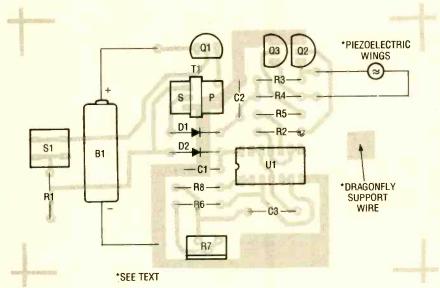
Solder the parts to the printed-circuit board as shown here. Note where the support wire solders to the board.
